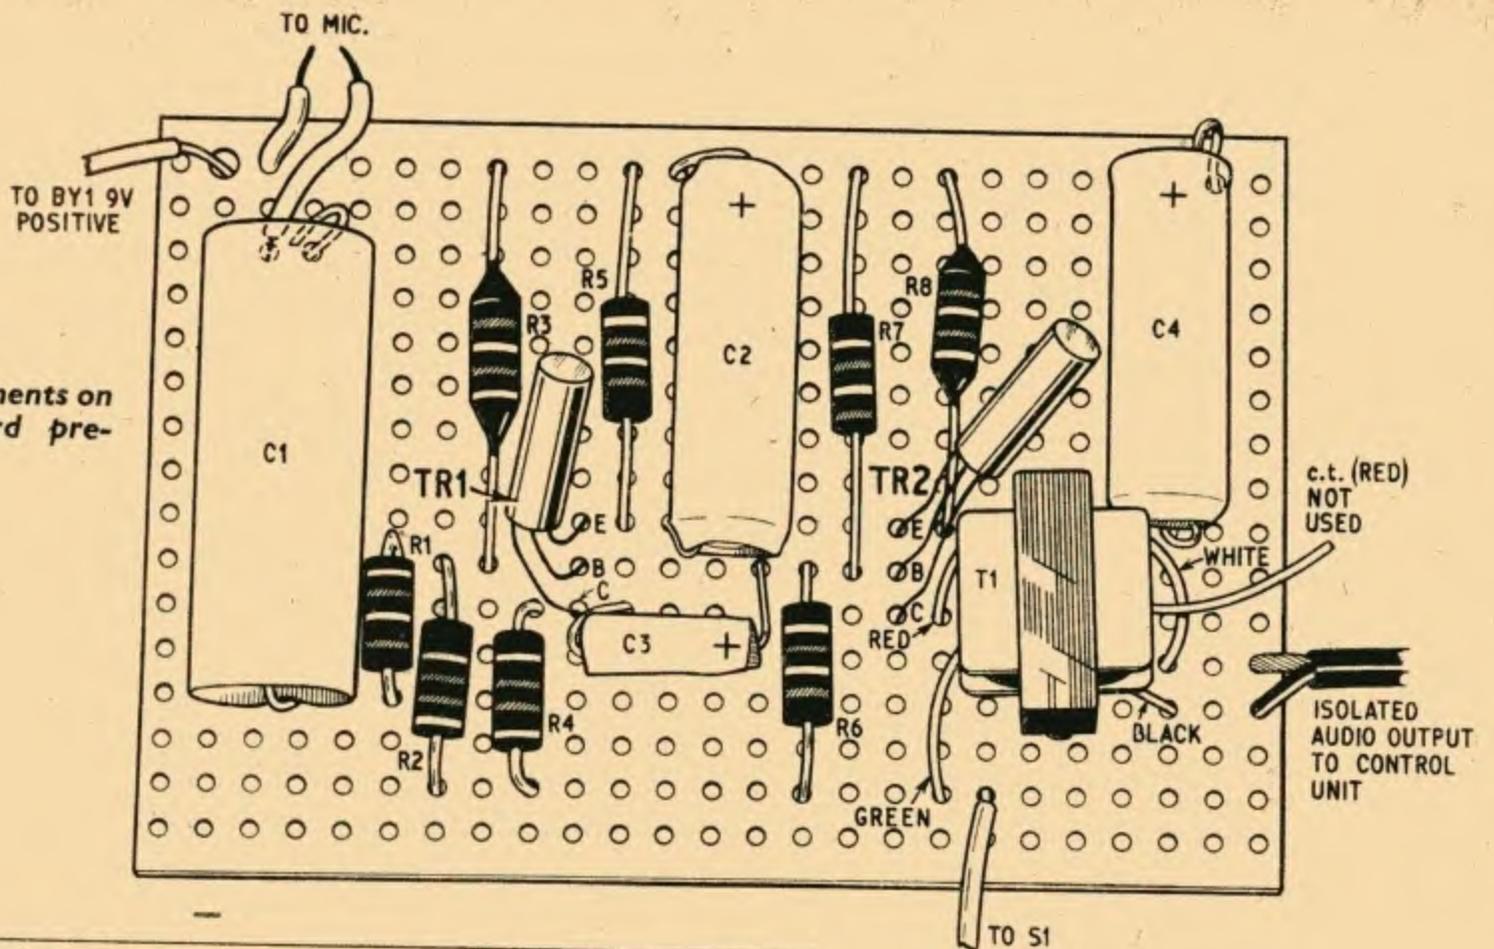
Layout of components on the printed wiring board pre-amplifier unit
